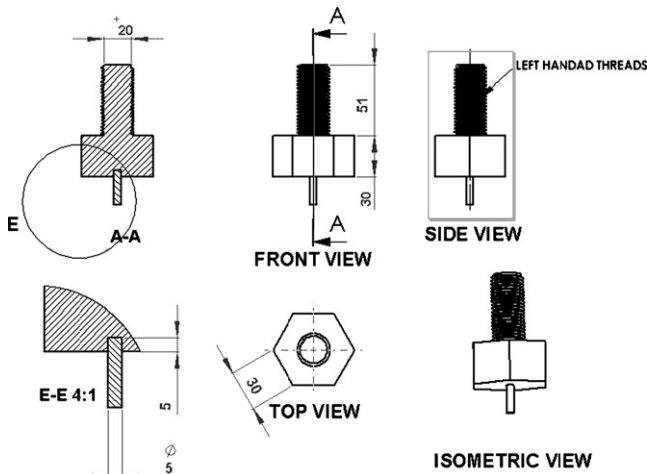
Detailed drawing of the tool geometry (Singh and Khamba, 2007a,b).
